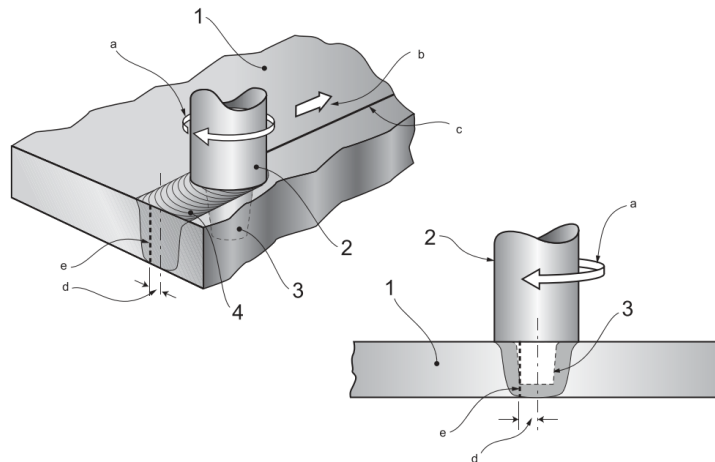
Lateral offset showing the centreline of the tool not centred on the joint. 1-Workpiece; 2-Tool; 3-Probe; 4-Weld face; a-Direction of tool surface; b-Direction of source; c-Joint (faying surfaces); d-Lateral offset; e-Location of joint before welding [2-13].
